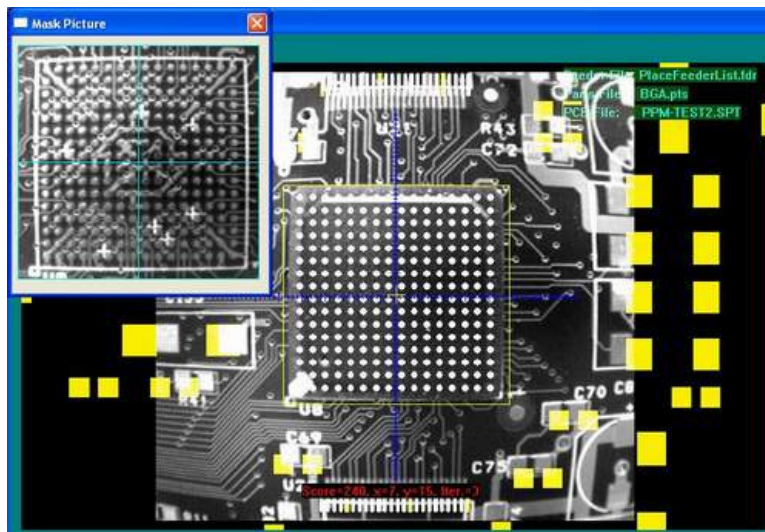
BGA pads on Board and LookUp View of Bottom of BGA Package
